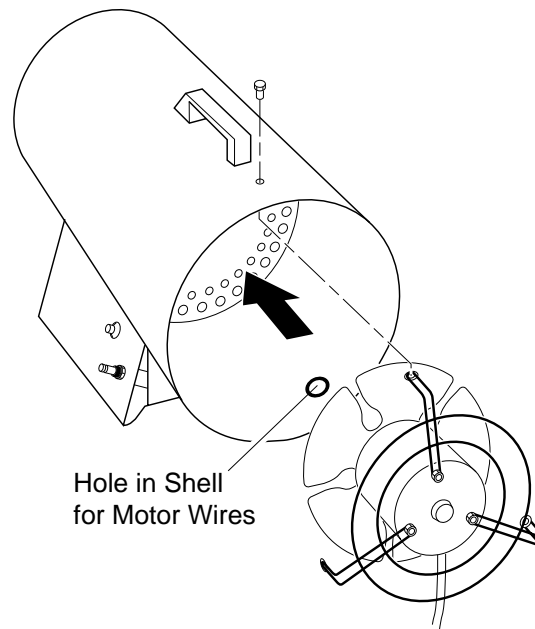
Removing or Attaching Fan from Motor Shaft
